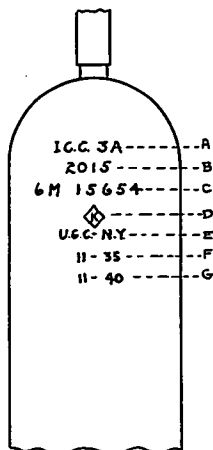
The engraving markings on the shoulder of cylinders for storing compressed gases.
